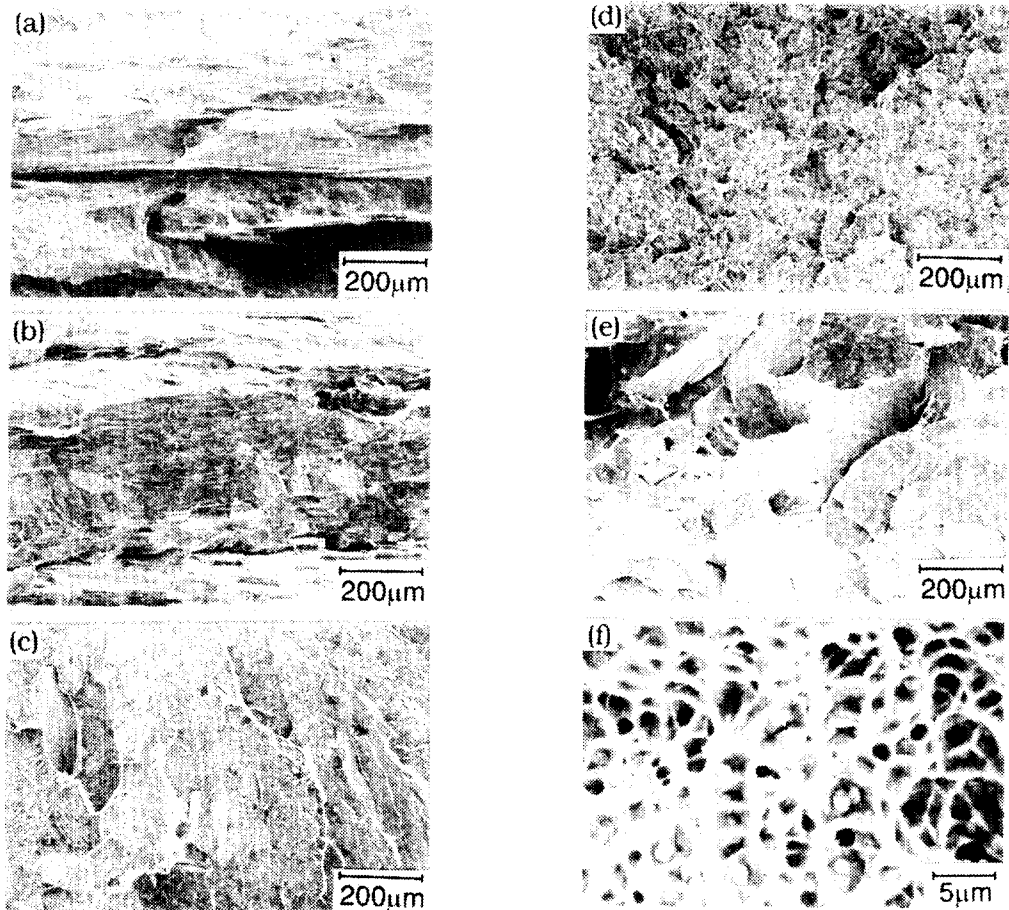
Fracture surface near the notch front subjected to impact test at  $-100^{\circ}\text{C}$ . (a) base metal, (b) weld metal, GTAW, (c) heat-affected zone, GTAW, (d) weld metal, SMAW, (e) heat-affected zone, SMAW, and (f) high magnification of (d)
